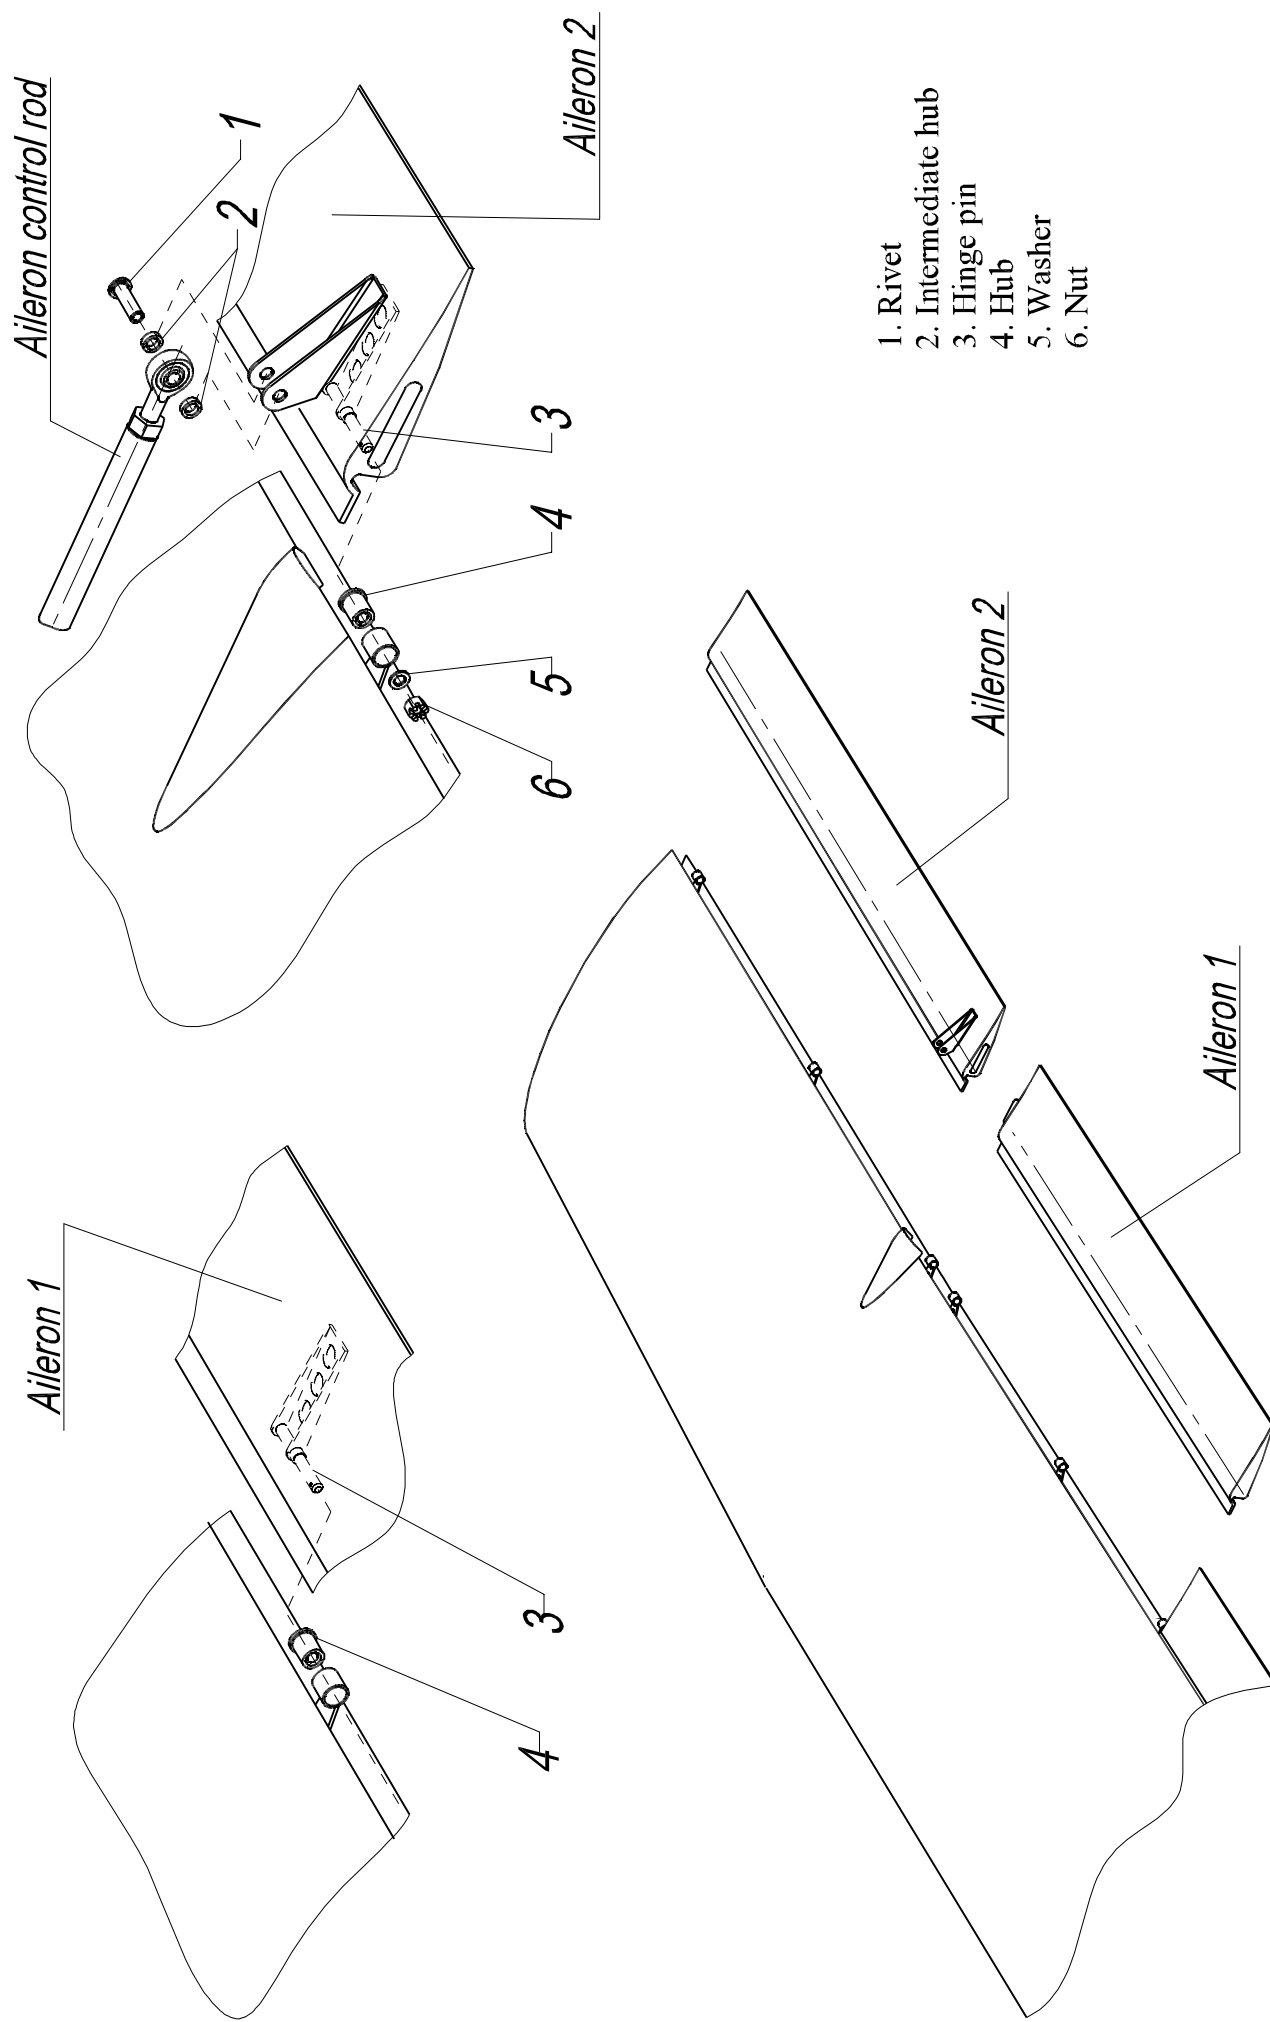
02. Mounting of ailerons of inner wing
